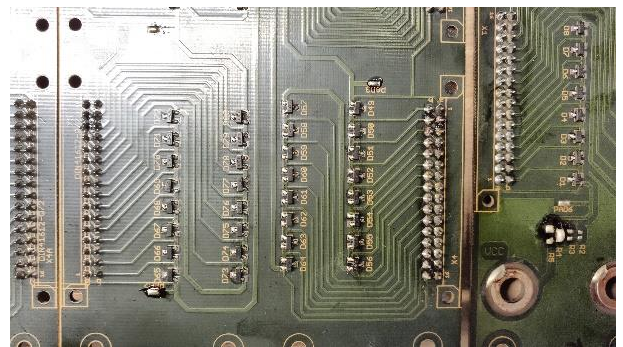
PCB prepared for the development test (detailed view). PCB, printed circuit board
